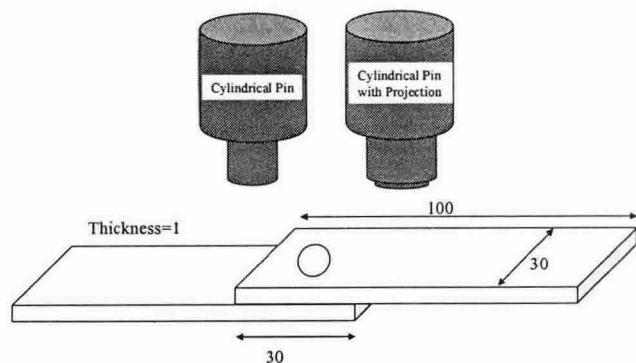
Schematic illustration of spot friction welding process, shapes of welding tool and specimens dimension
